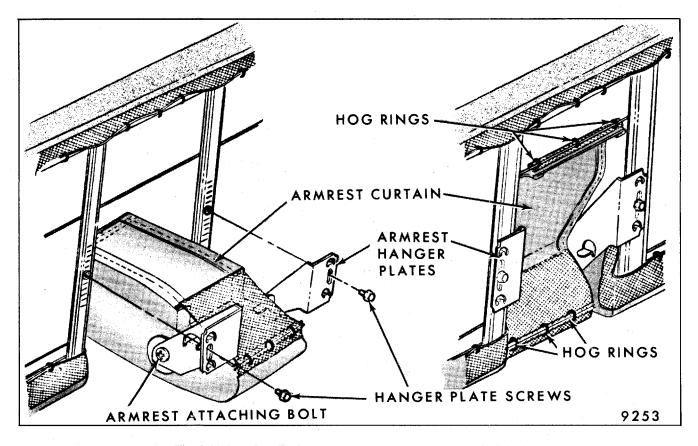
Rear Seat Back Center Armrest and Supports - All C Styles
